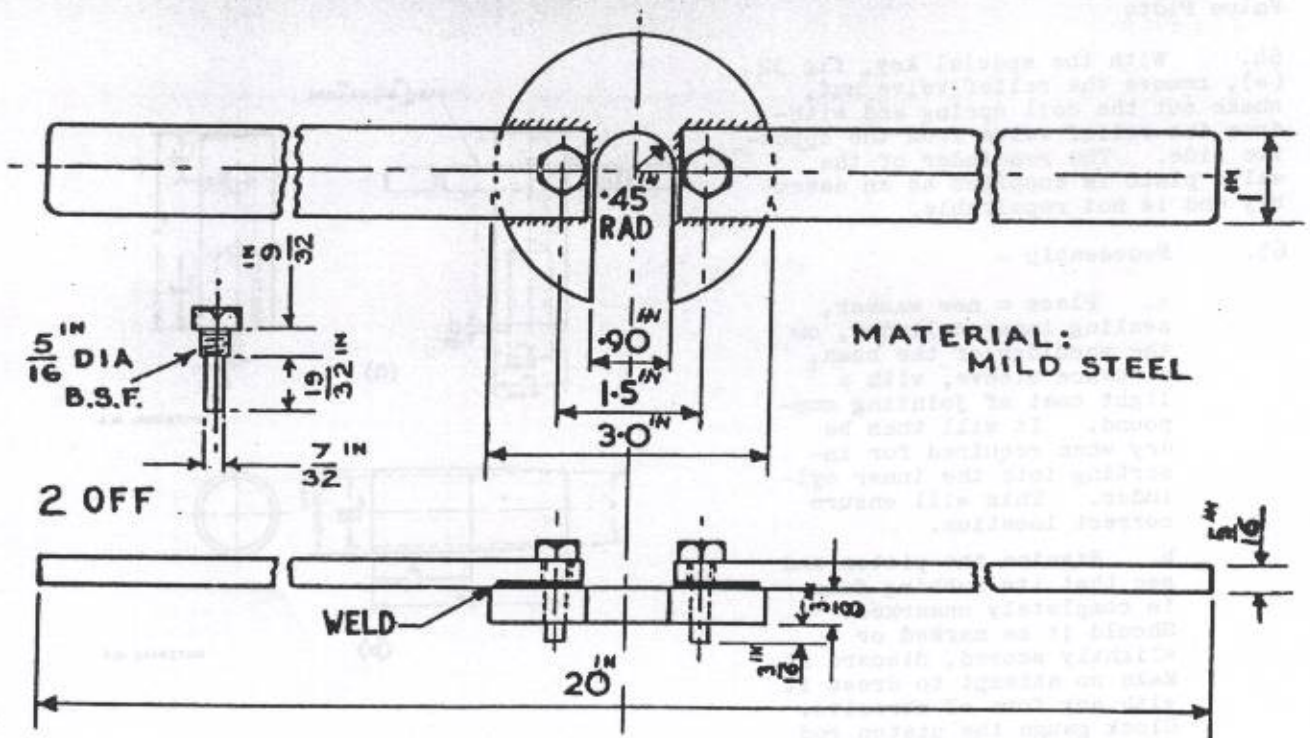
SHOCK ABSORBER - PEG SPANNER FOR NUT, RETAINING GLAND (LOCAL MANUFACTURE)
